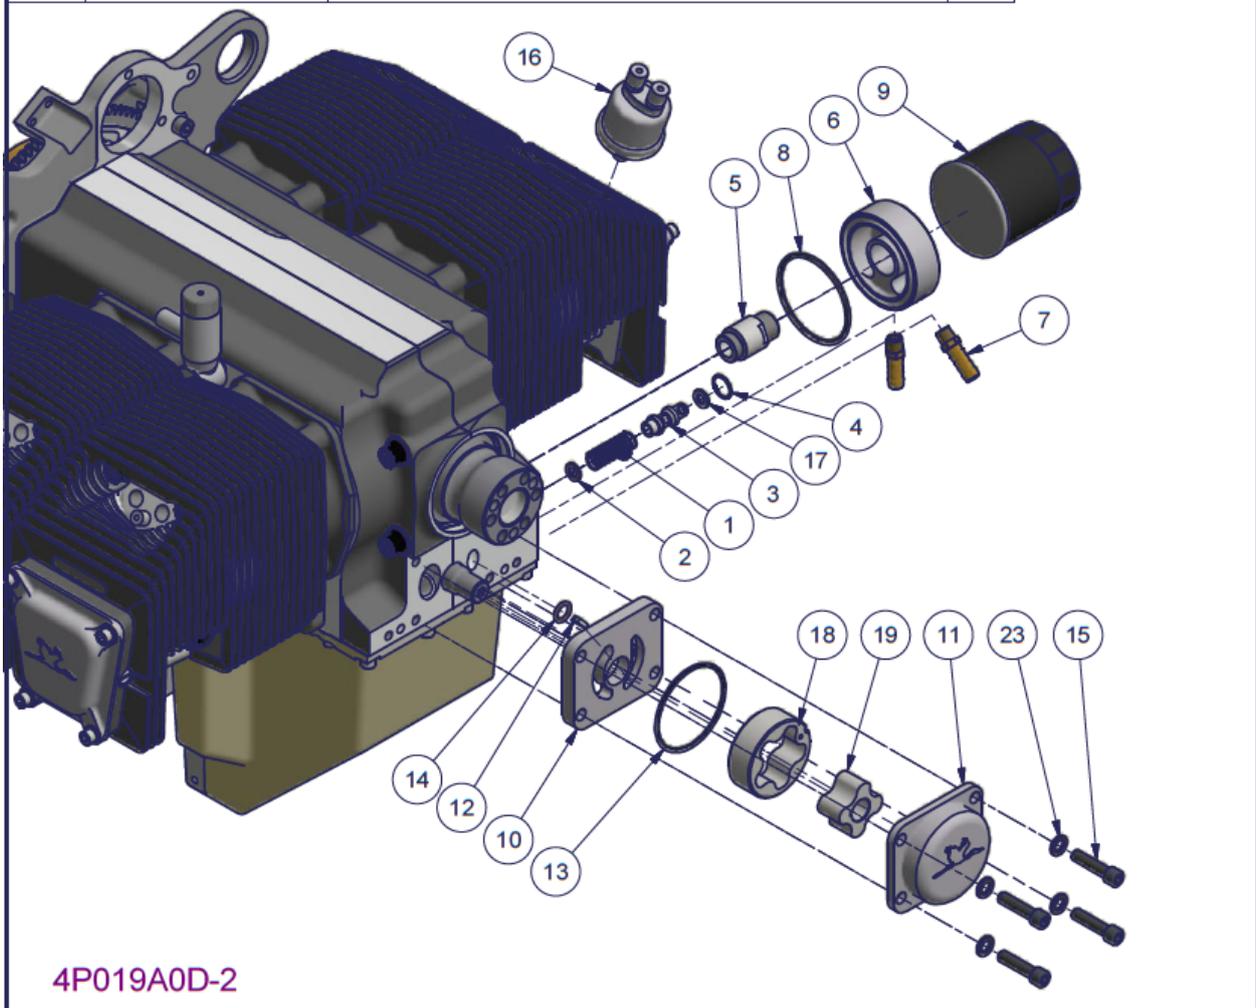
2200/3300 Oil pump and filter installation – Parts List
